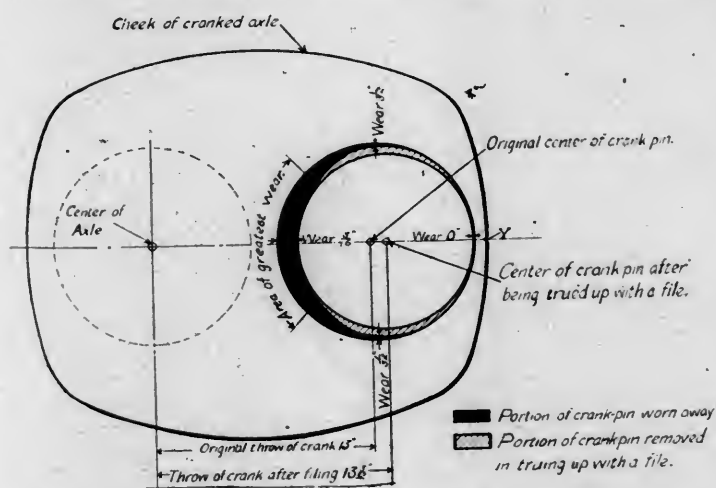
ILLUSTRATING THE WAY IN WHICH THE CRANK AXLE PINS WEAR OUT OF ROUND.
